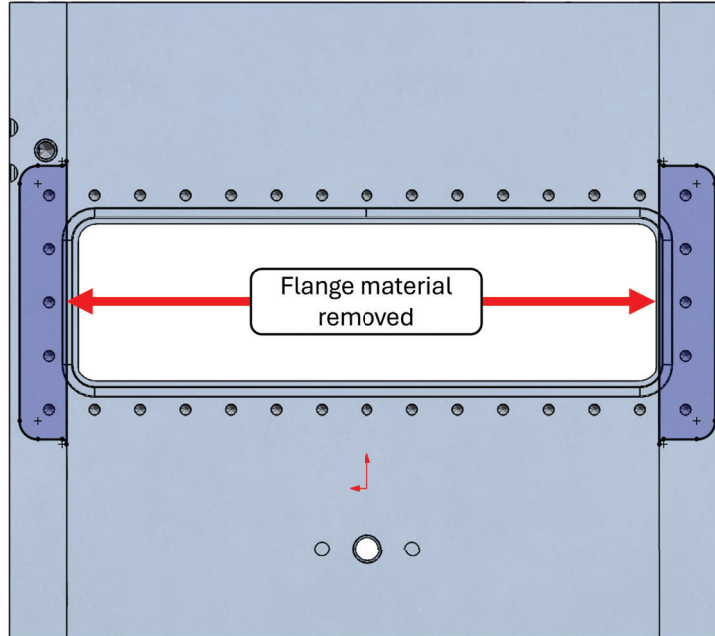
Part of the chamber bolt flanges needs to be machined away to accommodate the recycle ductwork attached to the cooling chambers.
